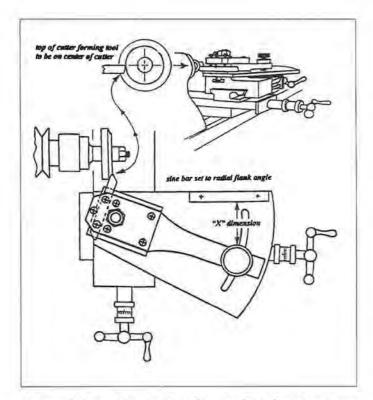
Cutter Forming Tool Sine Bar Slide Rest Attachment
